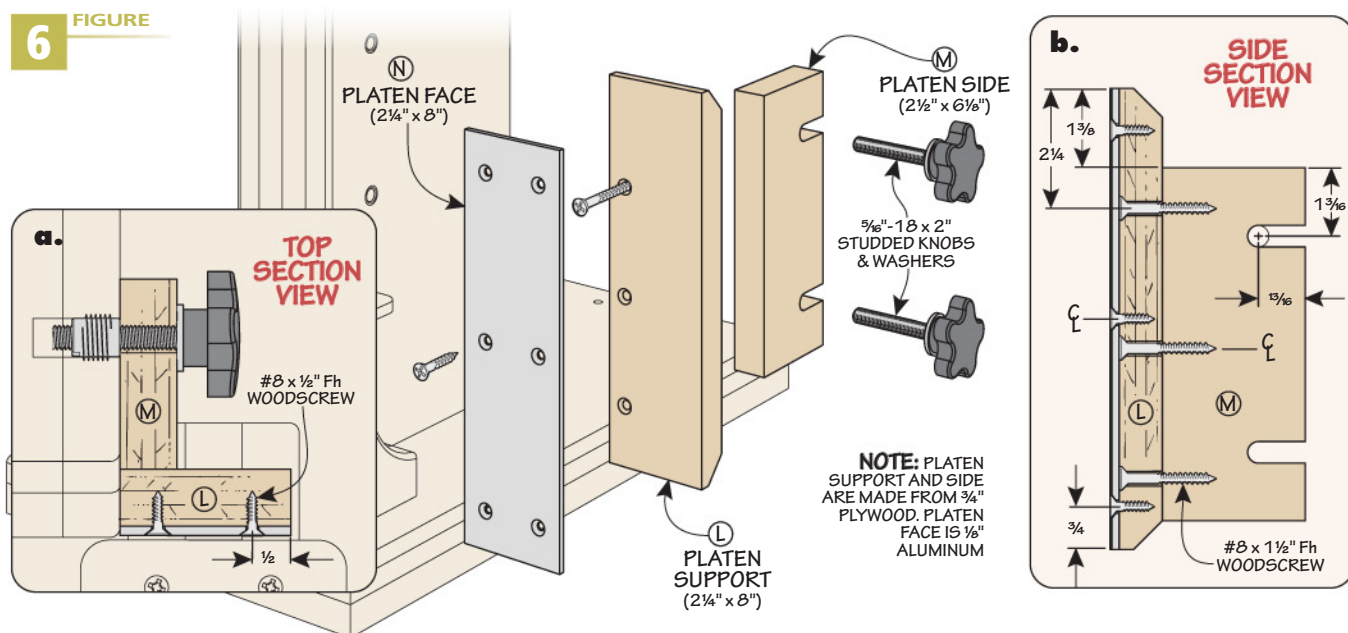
PLATEN ASSEMBLY. Working our way down the sander, we come to the platen assembly, as shown in Figure 6 below. This system backs up the belt, providing reinforcement for creating smooth, flat surfaces. However, there are times when you want to create a softened shape. So the platen is easily removable.
